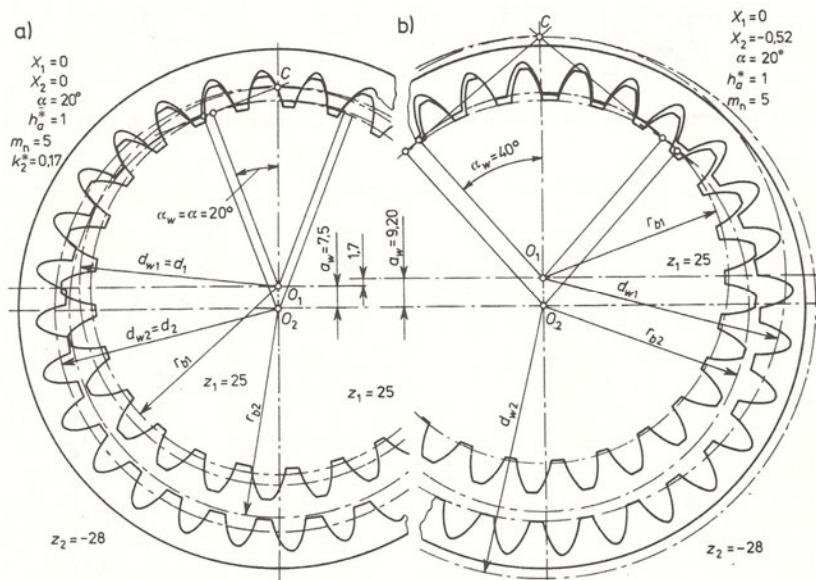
Internal gearing with (a) and without (b) interference of tooth tips [5]
